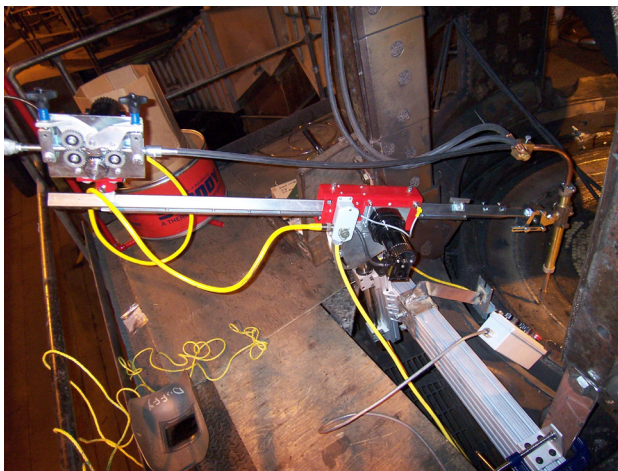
Mavrix\* Single Arm Pulverizer Rebuilding System
